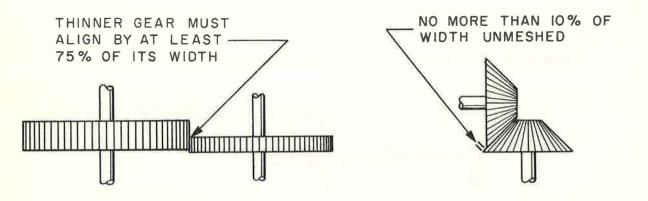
Alignment Limits for Spur Gears and for Bevel Gears
